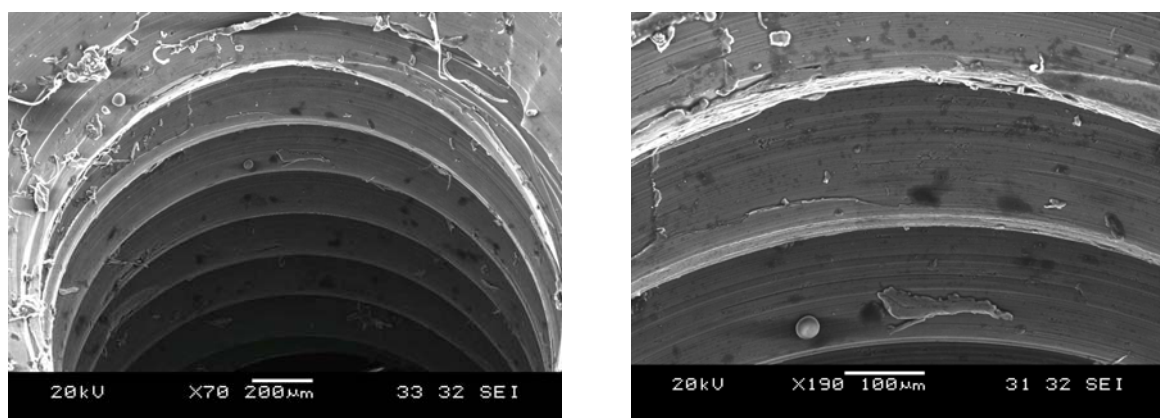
Metal residue inside the screw threads during their fabrication due to metal machining.
